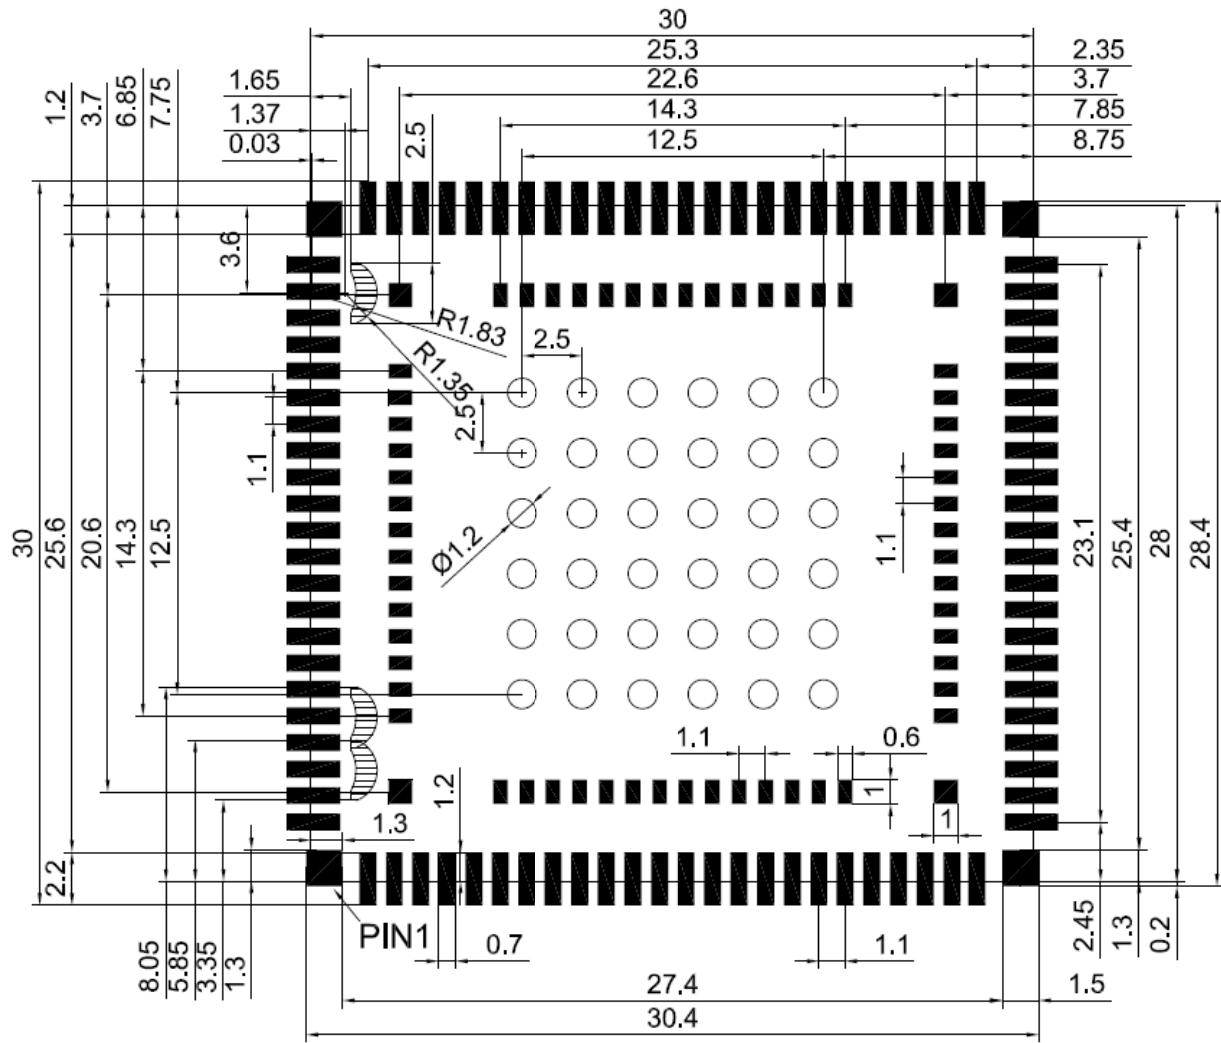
Bottom view of the N58-LA module PCB(unit:mm)
